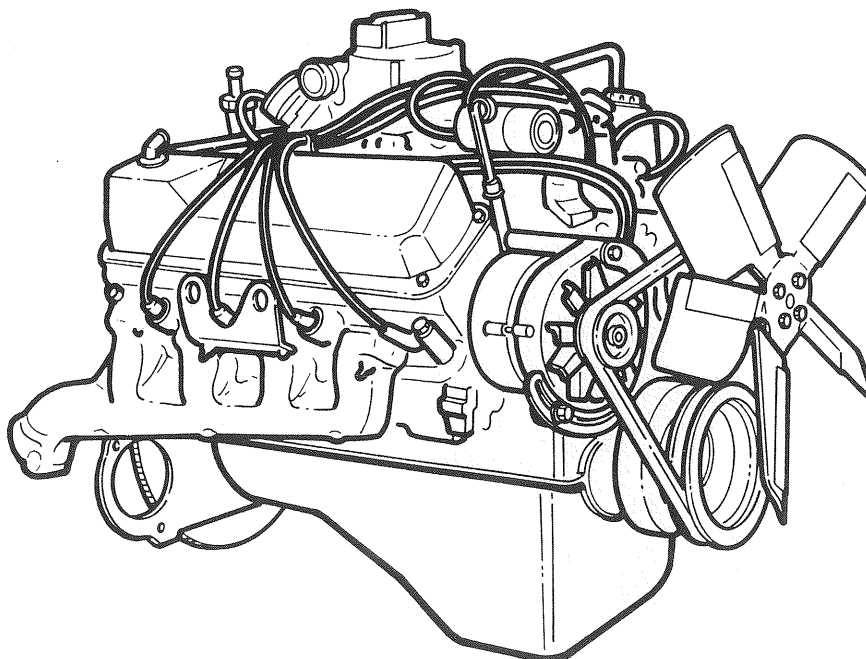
WSG-858 Engine — Typical (Left 3/4 Front View)
